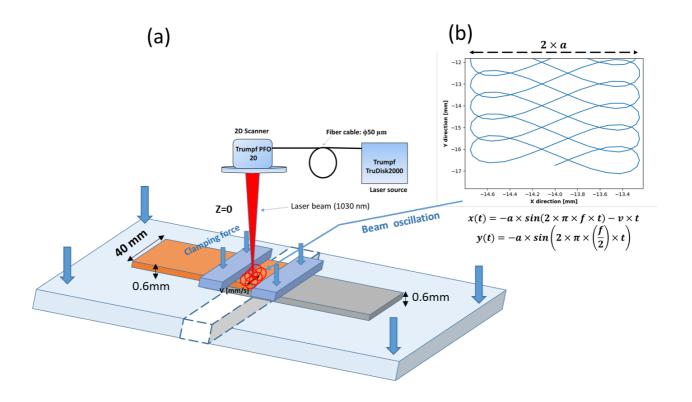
(a) Sketch of laser welding setup for copper on top and (b) Laser beam oscillation profile in form of infinite loops
